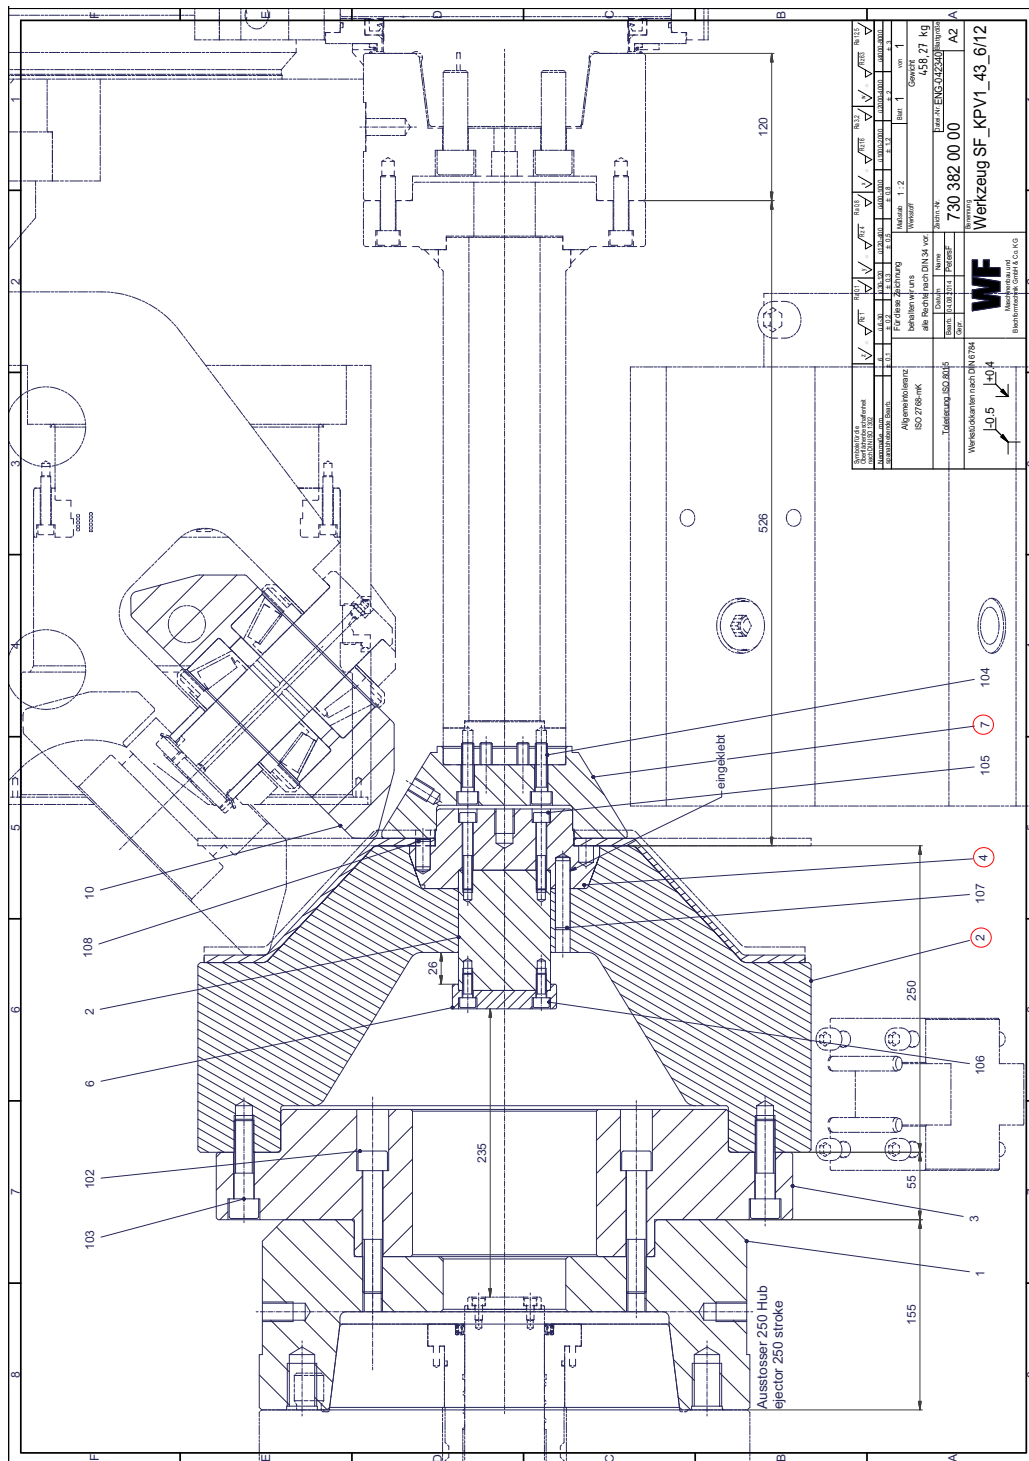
Assembly drawing – 43° geometry – 730 382 00 00, “Werkzeug SF\_KPV1\_43\_6/12” .
